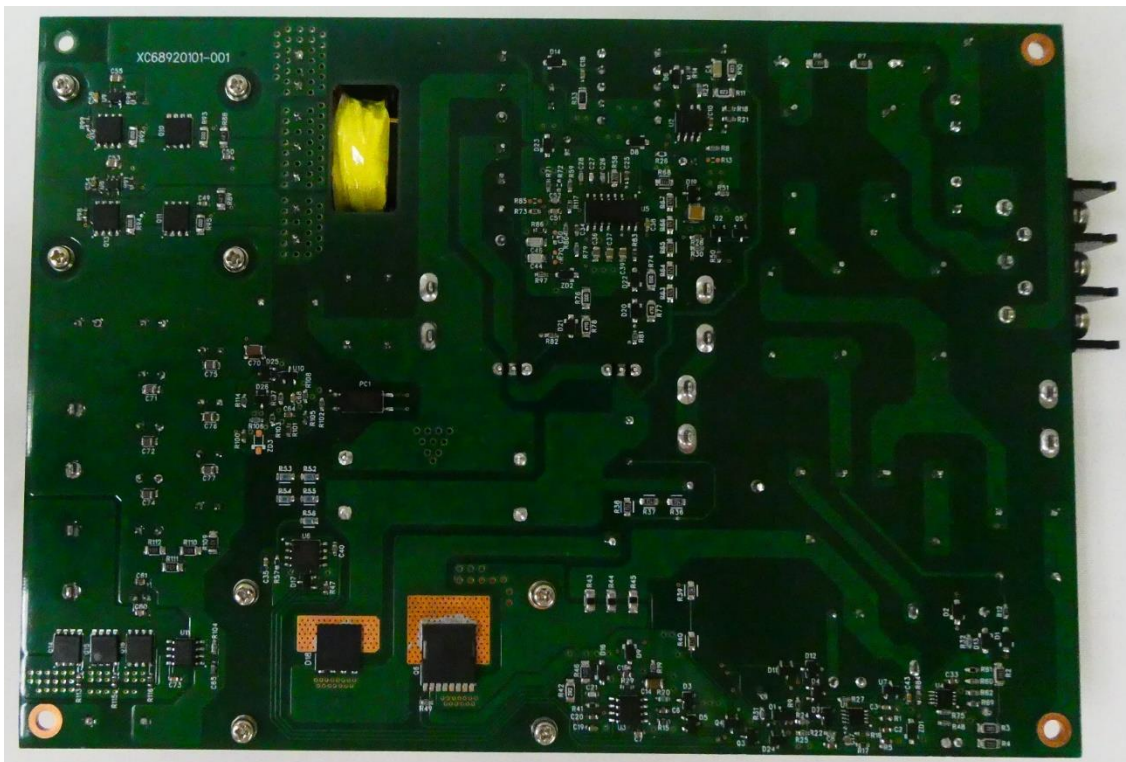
500 W Server Power Supply using TOLL Package DT MOS (Back Side)
